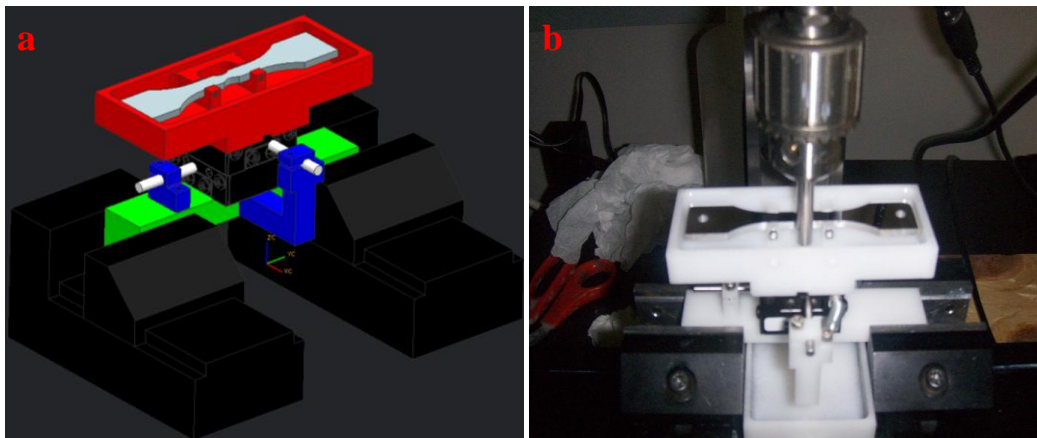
Spring loaded polishing fixture with the dogbone secured inside the tub (a). Polishing fixture secured in the CNC mill ready for the polishing sequence to start (b).
